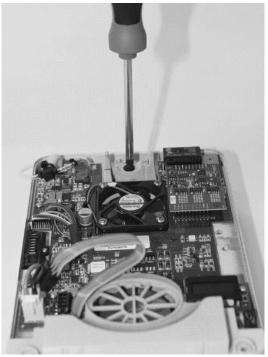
Outlet Nozzle Cradle Screw Removal
